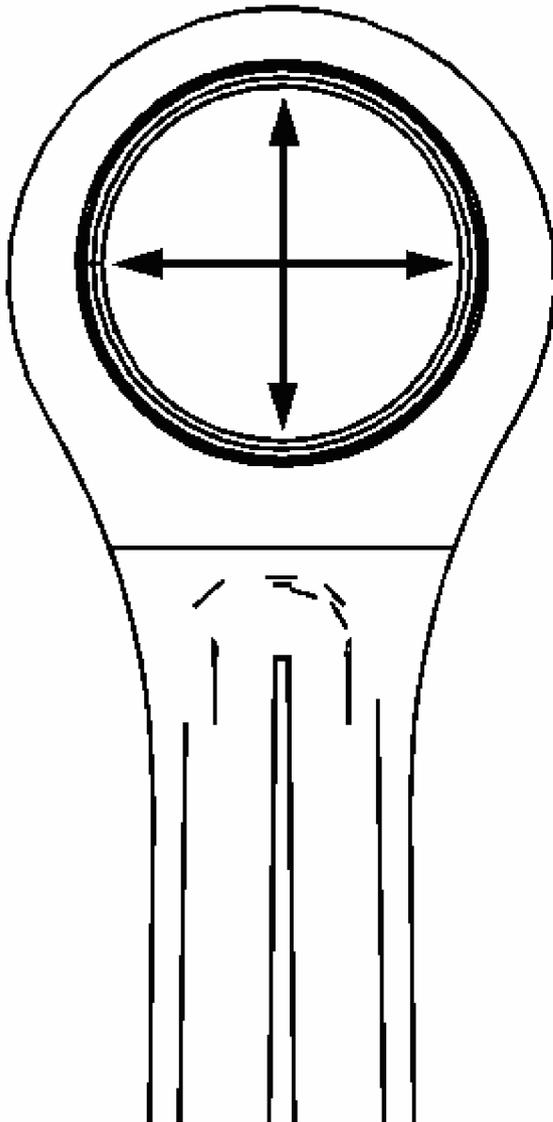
Checking Connecting Rod Piston Pin Bore Dimensions
